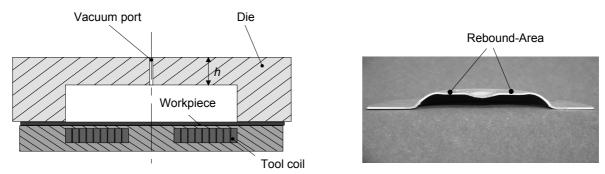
Example of a workpiece geometry caused by the rebound-effect
